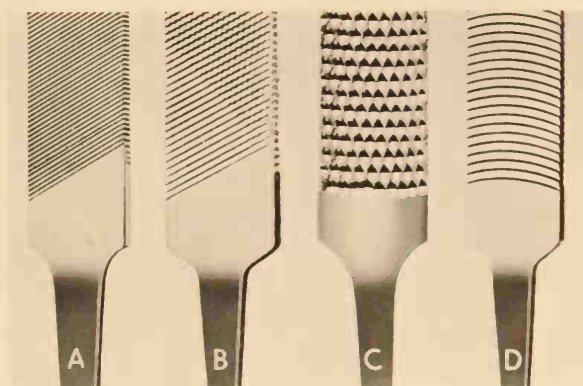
Cuts of files: (A) Single cut; (B) Double cut; (C) Rasp cut; (D) Curved-tooth cut. (Nicholson File Co.)
